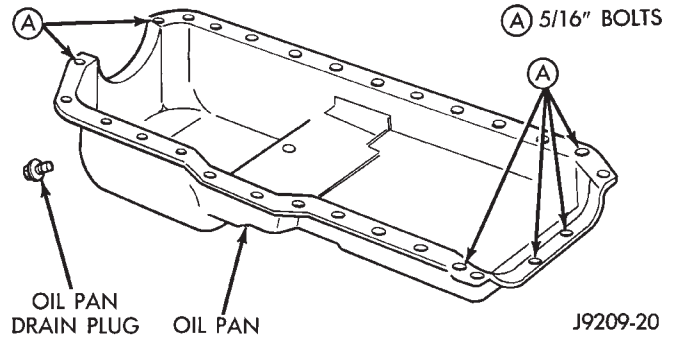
Position of 5/16 inch Oil Pan Bolts
